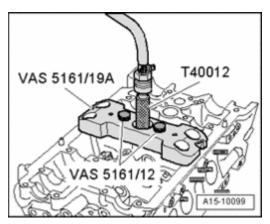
Placing Guide Plate VAS 5161/19 A From Valve Cotter Disassembly And Assembly Device VAS 5161 On Cylinder Head
